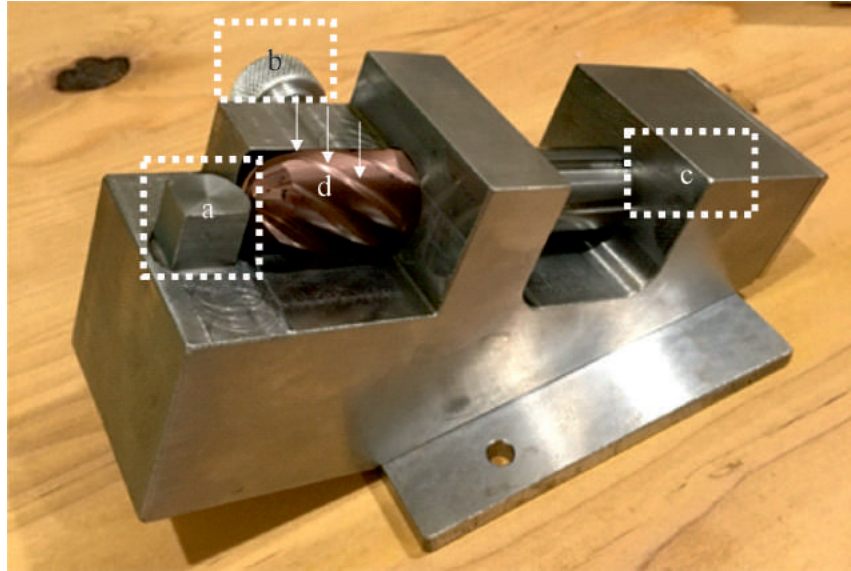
Photograph of the bespoke rig used for tool wear analysis of 20 mm ball nose milling tools with a. an orientation pin, b. locking pin, c. and spring which provided d. 3 imaging locations along each flute of the milling tool.
